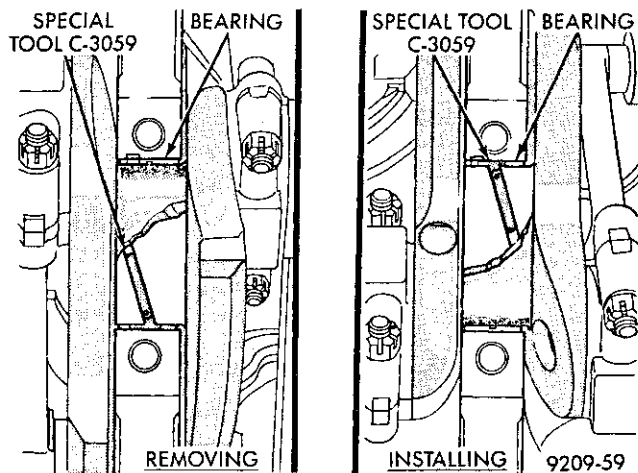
Upper Main Bearing Removal and Installation with Tool C-3059
